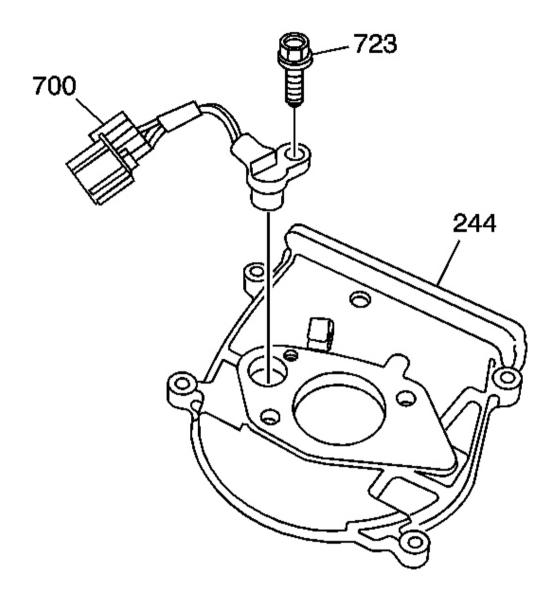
View Of Bolt & Camshaft Position (CMP) Sensor Courtesy of GENERAL MOTORS CORP.
